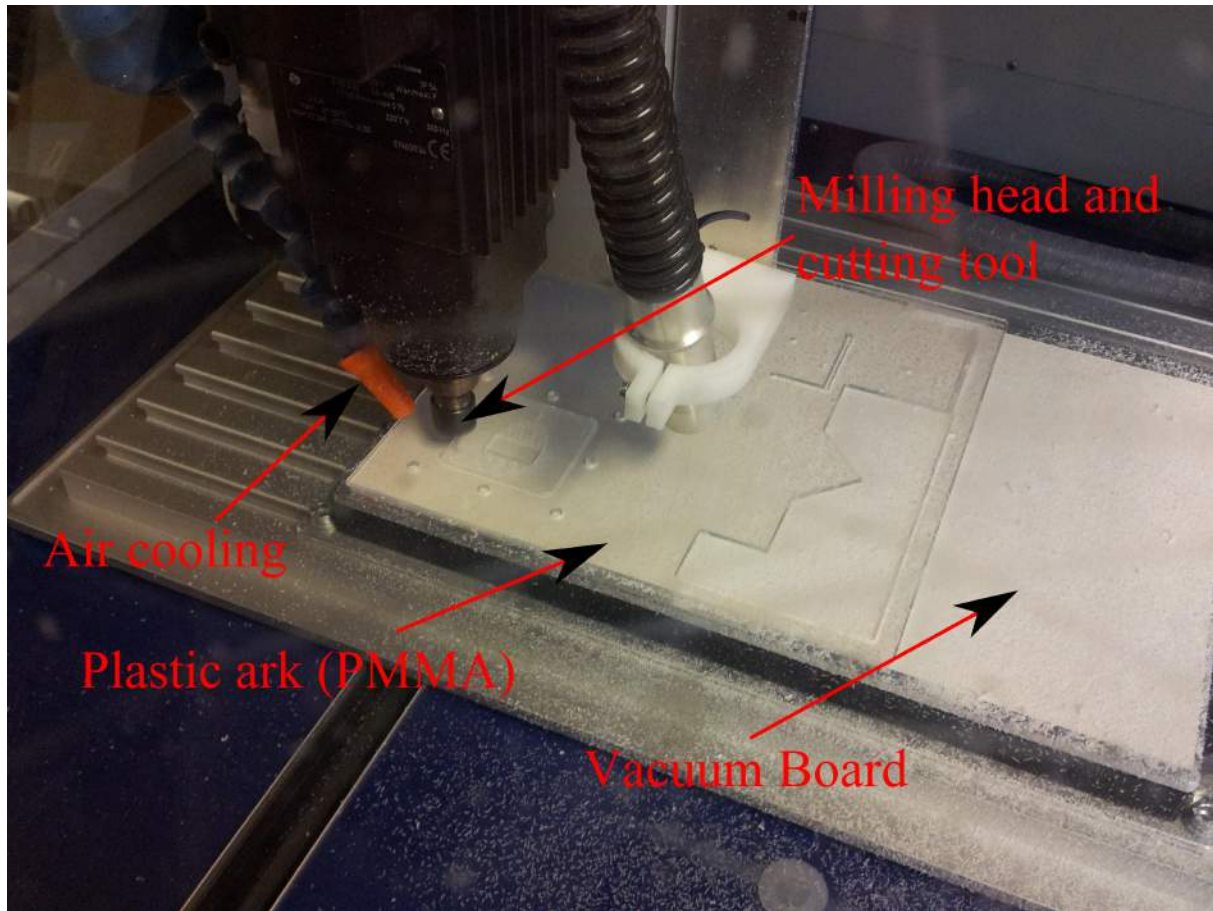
Milling of the culture chamber PDMS mold. Air cooling is directed towards the area where the cutting tool mills the plastic material to avoid melting and potential damage to the cutting tool. The vacuum board fixes the plastic sheet during the milling process.
